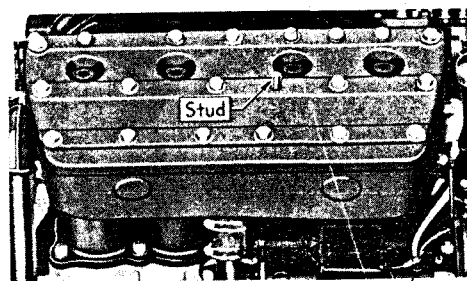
When removing the cylinder head on V-8 engines, replace one of the center cap screws with a stud before removing the remaining screws to prevent the head from sliding down and damaging the valves.
